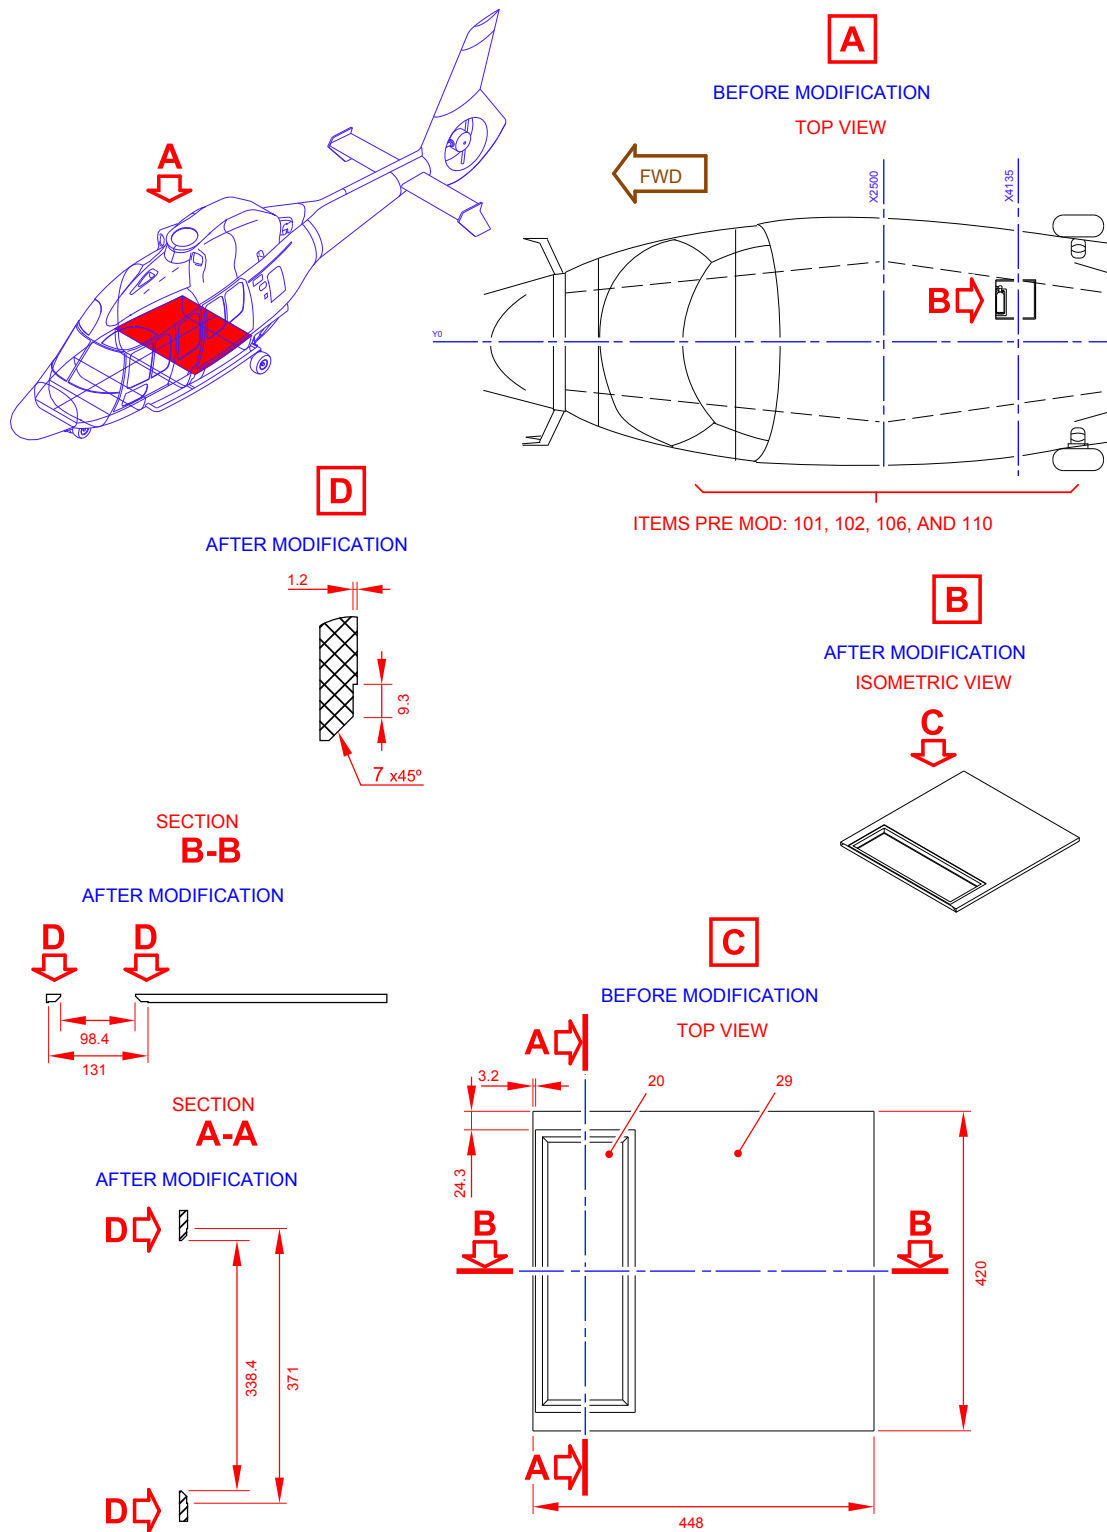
Position 7 = Procedure for manufacturing the drawer bottom
